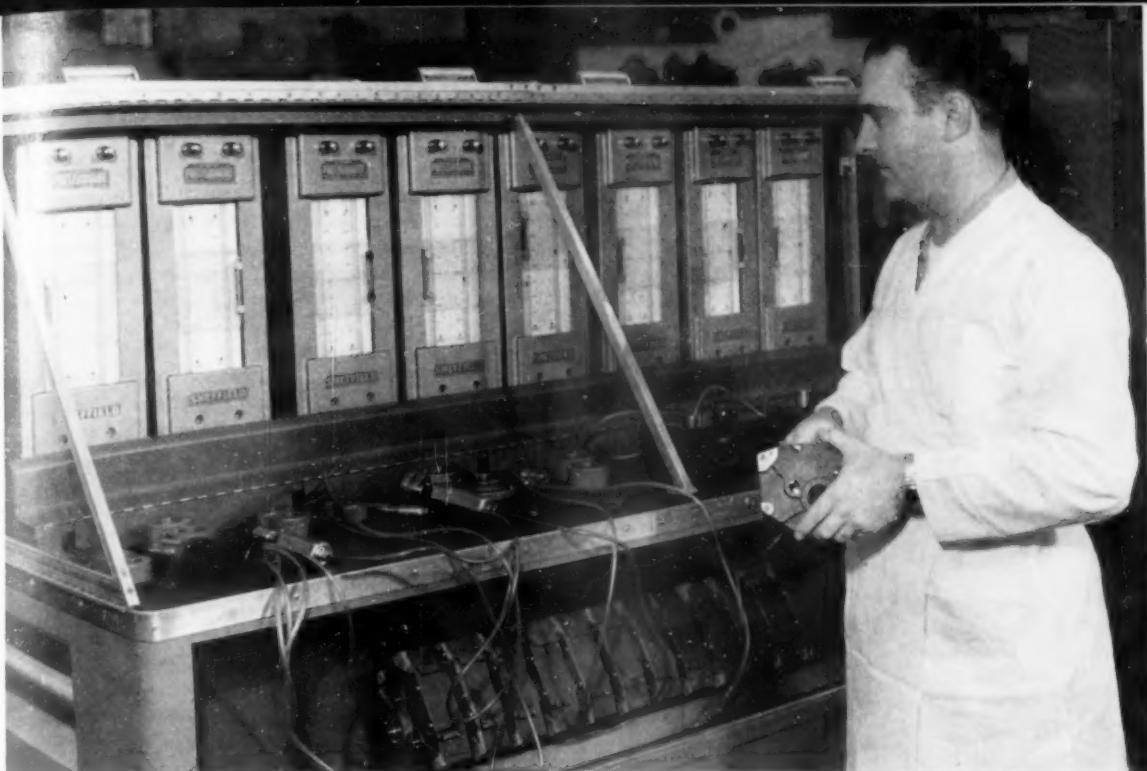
Inspector checking a part taken from a pilot run. Inspection is made by variables with an air gage to secure data to determine machine capability.
